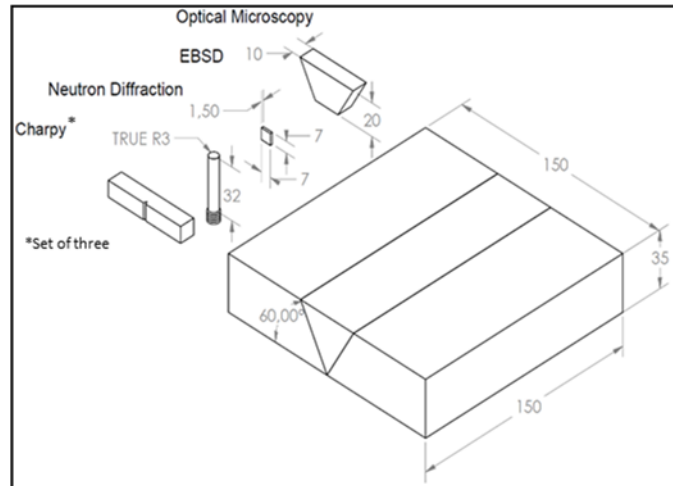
Schematic depiction of weld coupons with sample dimensions and orientations of samples extracted from the coupons. Dimensions are reported in millimeters
